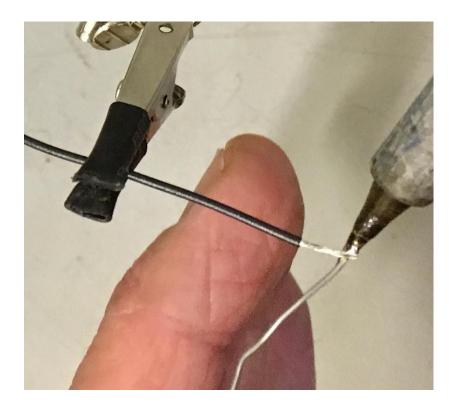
Tinning stripped LED wire before soldering using helping hand.
